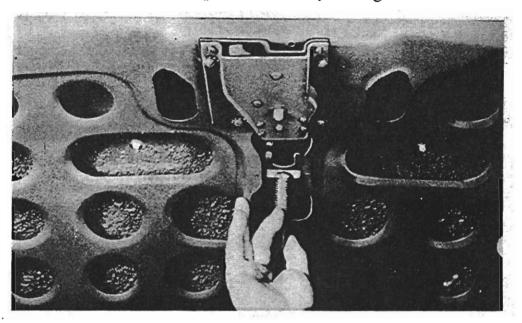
Install the Lock Cylinder Case Retaining Clip.
